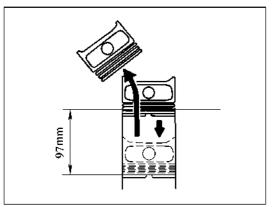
6 - 38 Check the Opening Clearance of Piston Ring
